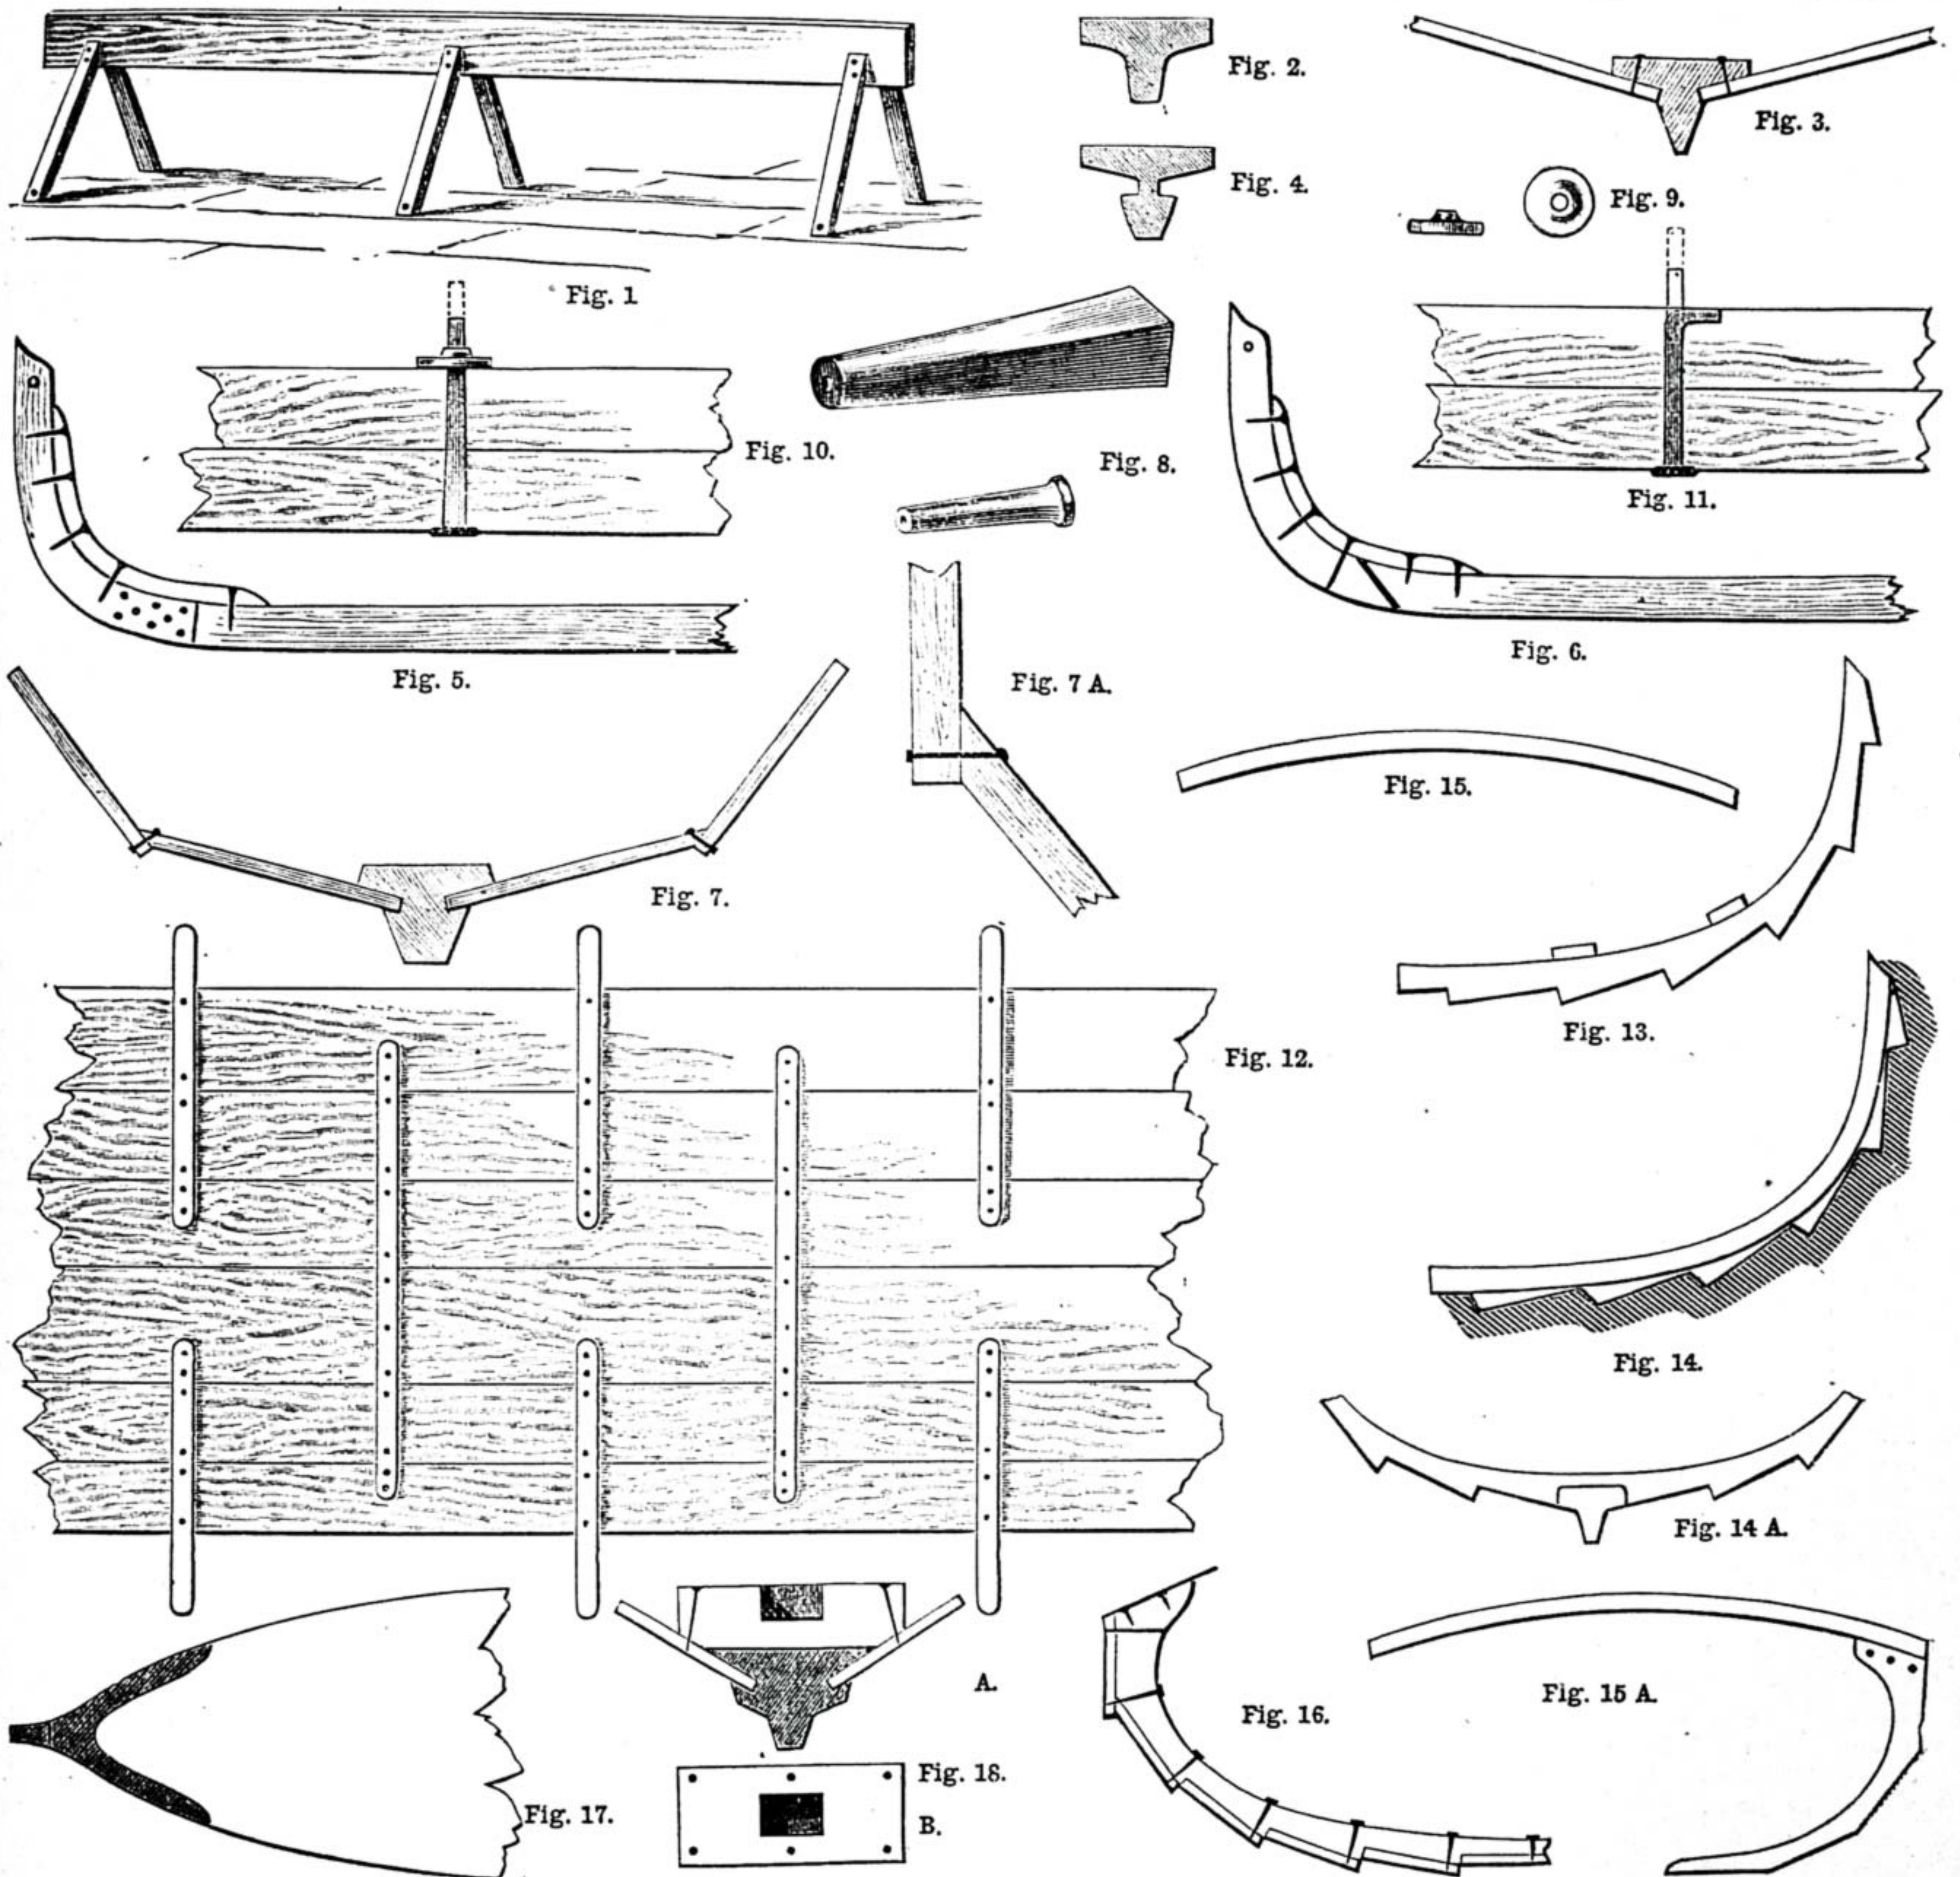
Stocks. Fig. 2.—Section of Keel. Fig. 3.—Garboard fixed to Keel. Fig. 4.—Rebate for Garboard. Fig. 5.—Scarf for Keel and Stem. Fig. 6.—Scarf or Sloping Joint for Keel and Stem. Fig. 7.—Chamfer at Edge of Planks. Fig. 7 A.—Chamfer of Plank on larger scale. Fig. 8.—Rooving-Iron or Anvil. Fig. 9.—Burr or Roove. Fig. 10.—Nail with Roove on. Fig. 11.—Nail without Roove. Fig. 12.—Diagram showing how Timbers and Ties should be put in Canoe. Fig. 13.—Timber shaped to Planks. Fig. 14.—Timber ready for Marking. Fig. 14 A.—Timber cut on each side of Keel for Drainage. Fig. 15.—Deck Beam. Fig. 15 A.—Deck Beam fastened to Top of Timber. Fig. 16.—Timber cut to fit Deck. Fig. 17.—Fork or Crutch at Stem. Fig. 18.—Step of Mast and how to fasten it, shown in Section (A) and Plan (B).
